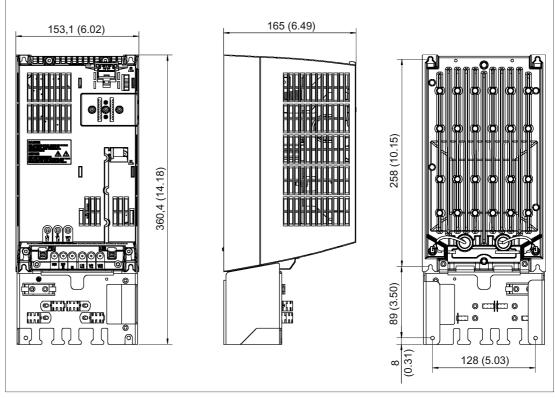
Dimension drawing of PM340 Power Module with Screening Kit, frame size FSB, all dimensions in mm and (inches)
